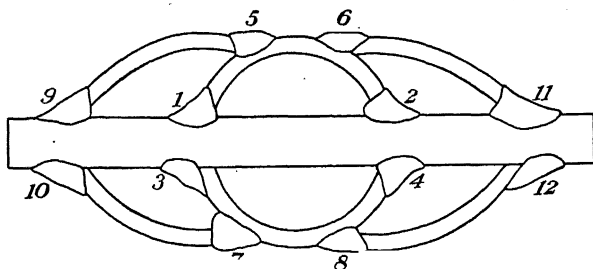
Etched section of tube cluster and plate weld.
